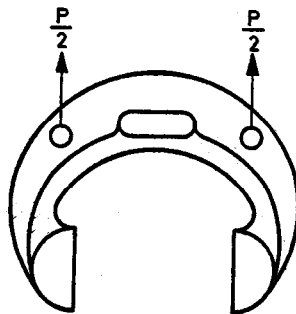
LOCATION OF POINTS WHERE FORCES COUNTERBALANCING PART OF WEIGHT OF GAUGE SHOULD BE APPLIED
